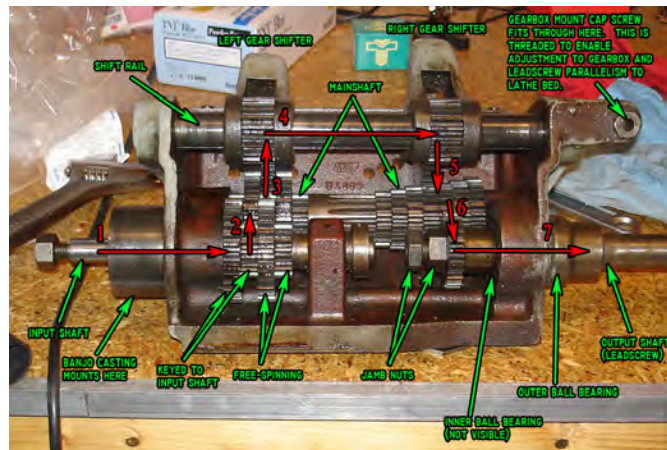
Gearbox showing parts and power pathway. Red lines trace power as it moves through the assembly.
